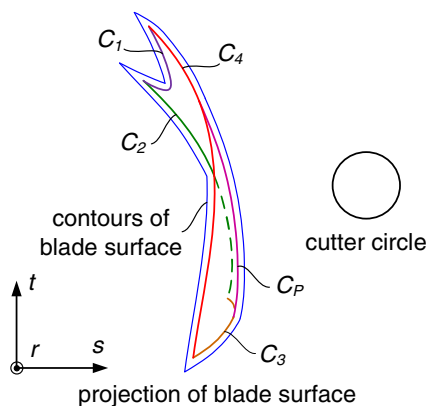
Projections of cutter and blade surface on the *sot* plane
